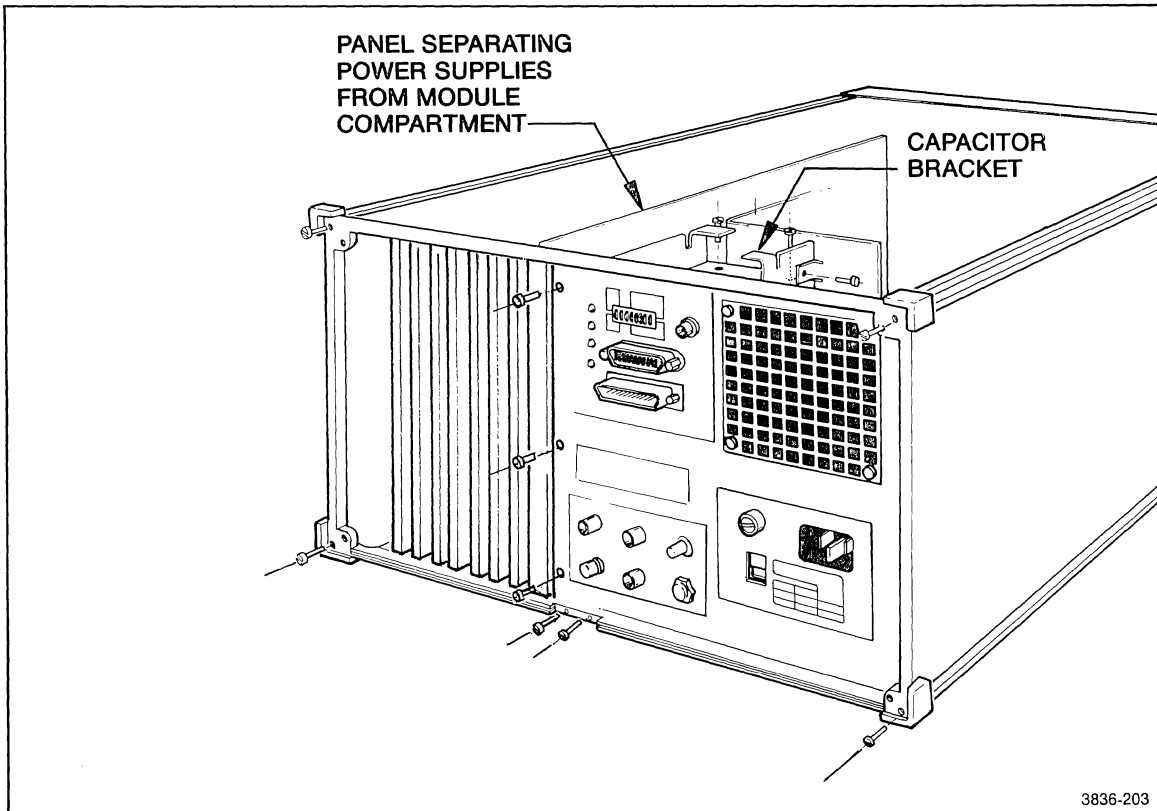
Removing the rear casting so the interconnect board can be removed from the mainframe (COLOR ONLY).
